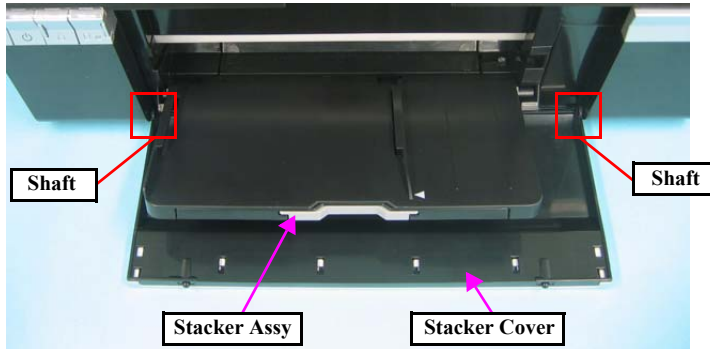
Removing the Stacker Assy / Stacker Cover
